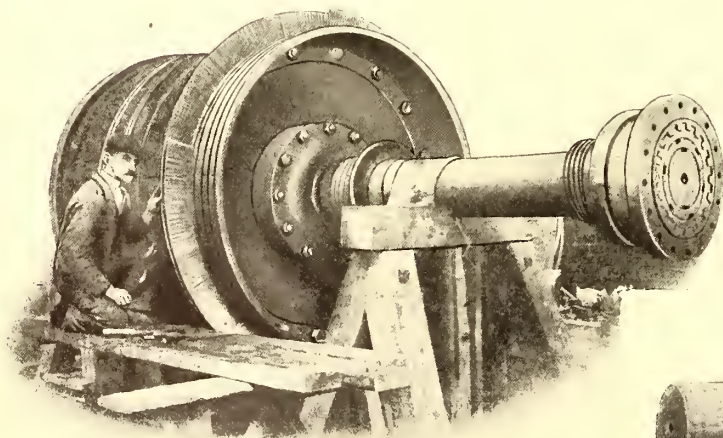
SPINDLE OF 5500-KW TURBINE
